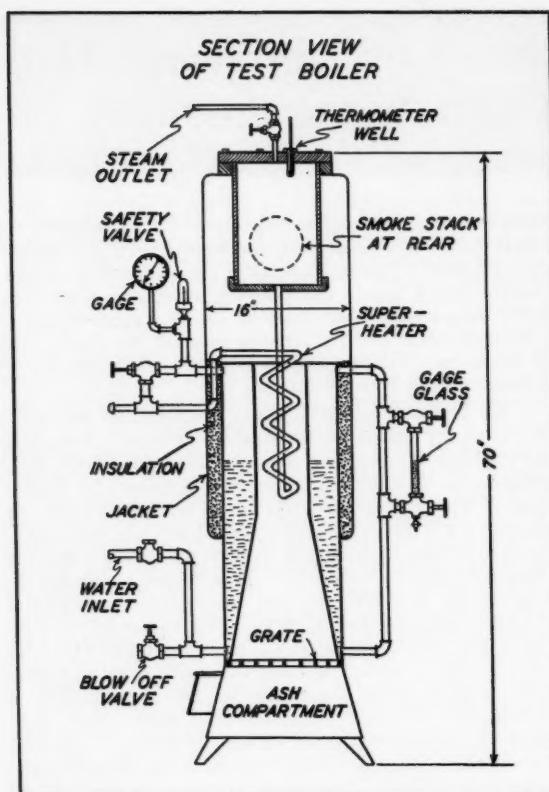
(LEFT) SECTIONAL VIEW OF TEST BOILER.
